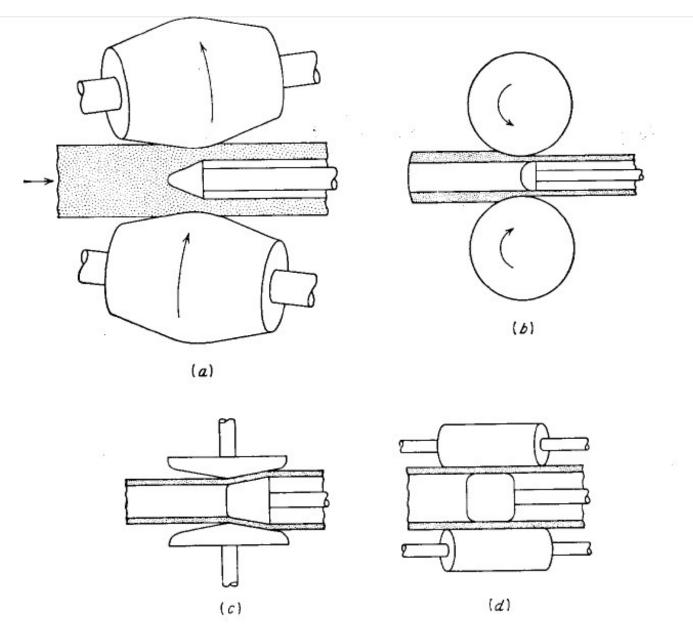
(a) Mannesmann mill; (b) plug rolling mill; (c) three-roll piercing mill; (d) reeling mill.
